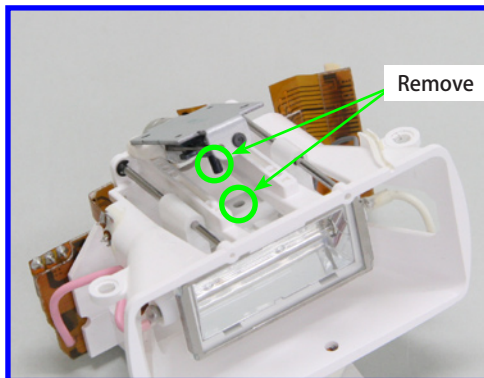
Removal of the Reflector Ass'y and the Motor Ass'y
